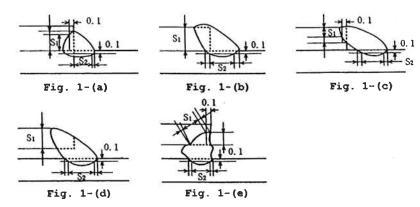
Lap Fillet Weld (Unit: mm)
